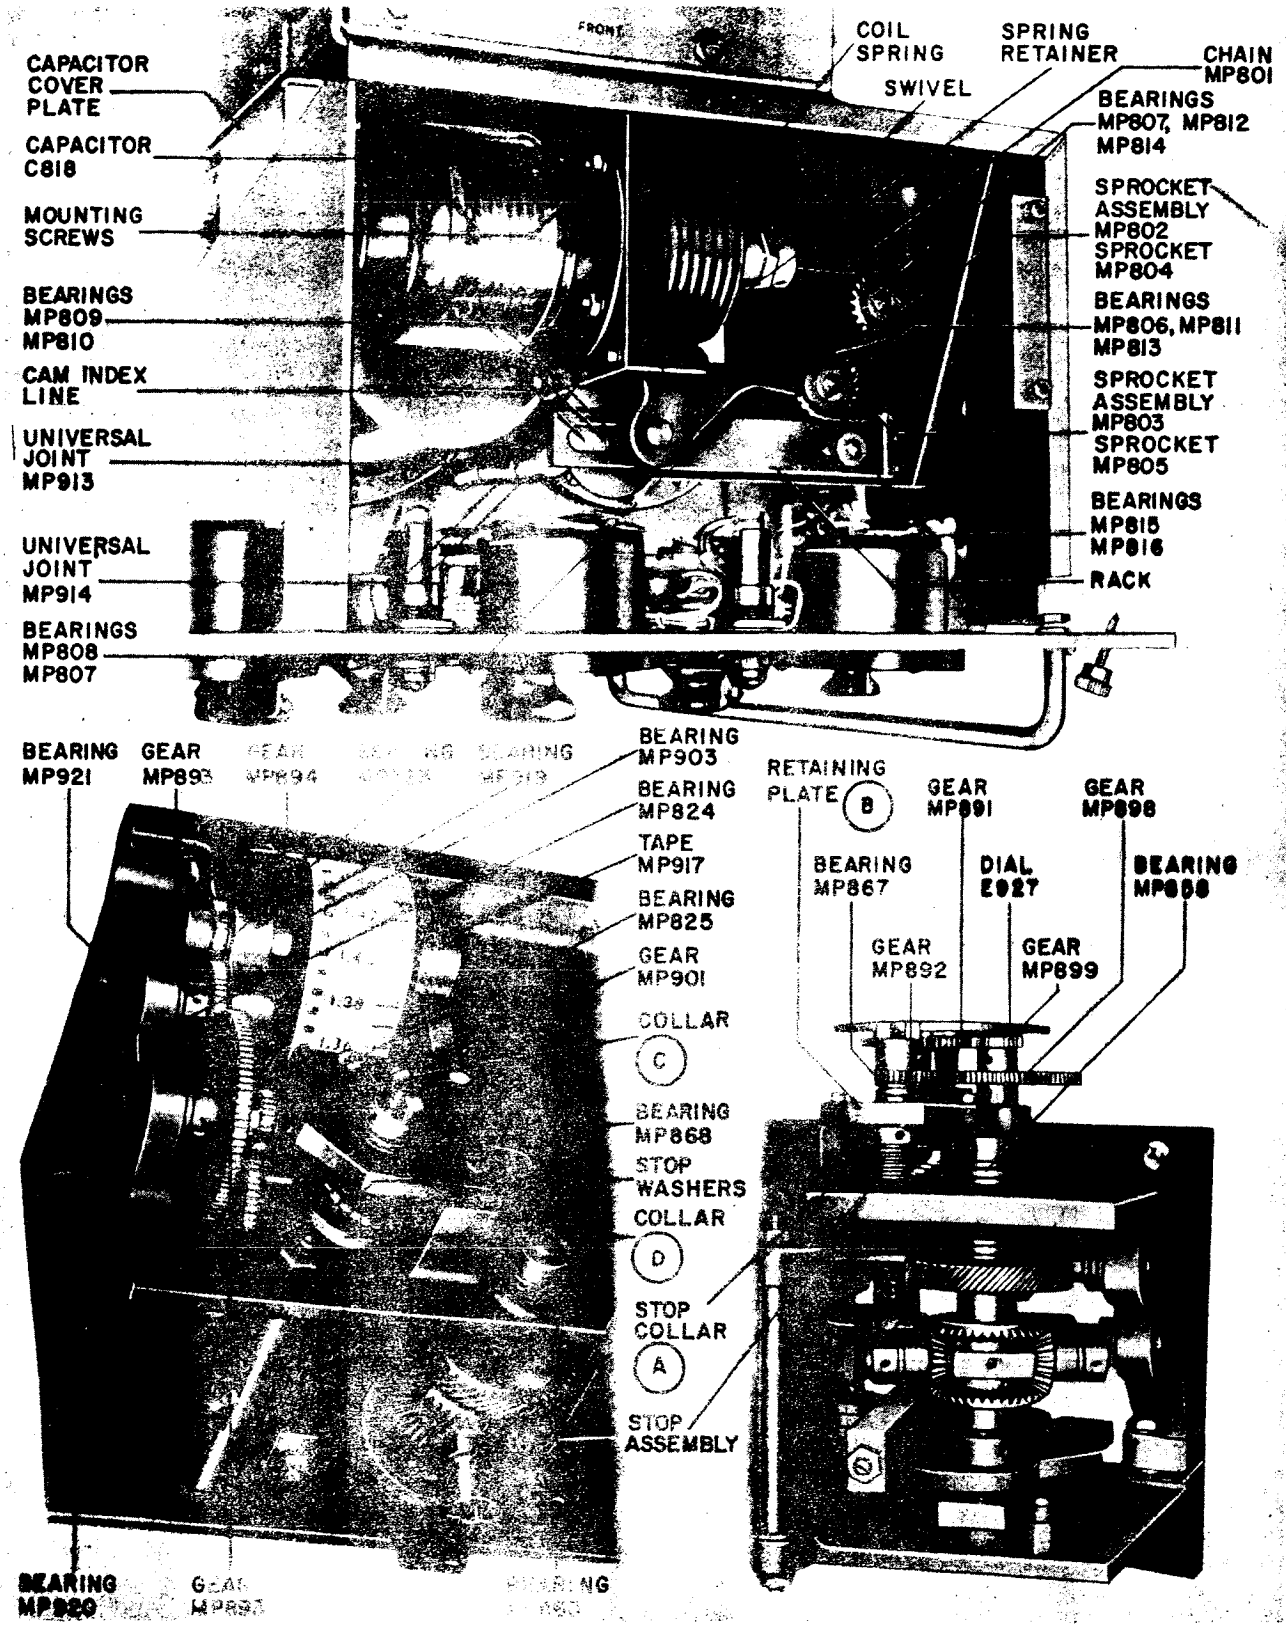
AN-107/WRT-1 Timing and Coupling Mechanism, Internal Parts and Capacitor Drive
